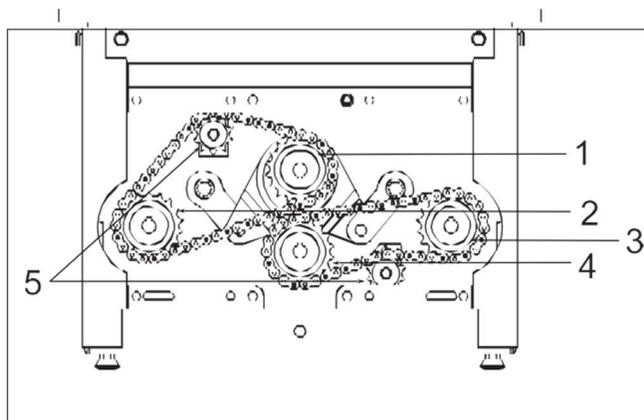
300 & 600 Dual Drive Sprocket Configuration
